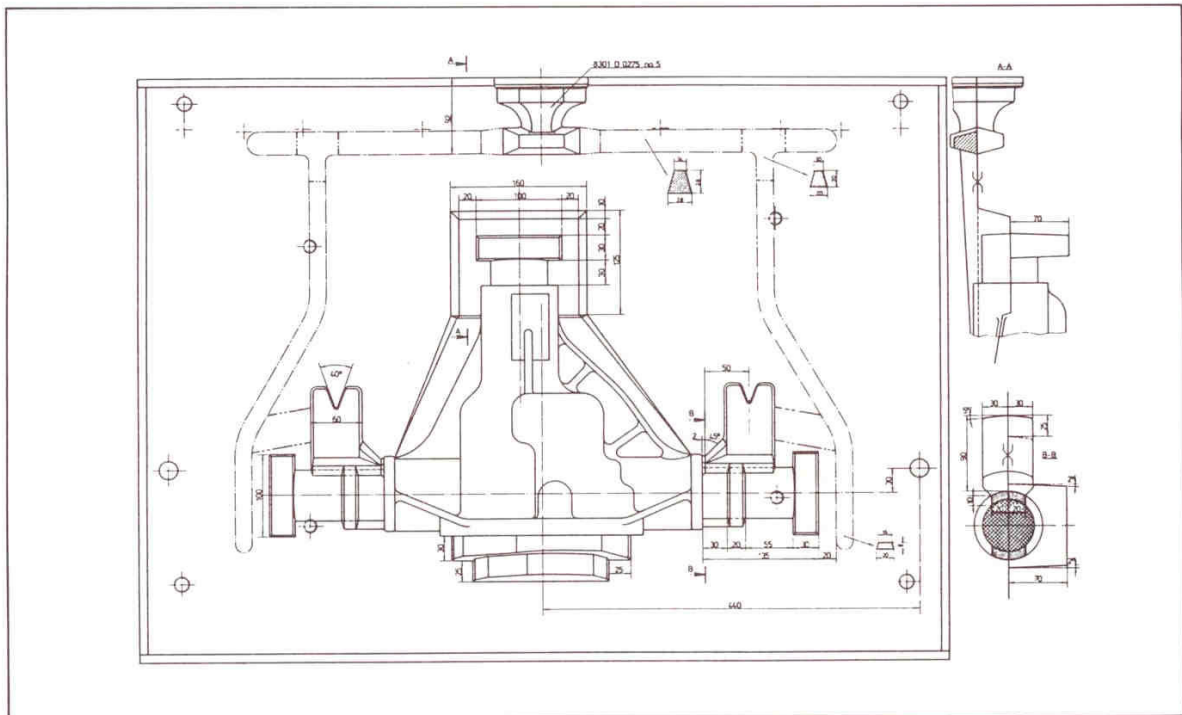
Example of a typical layout drawing designed according to DISA standards.
